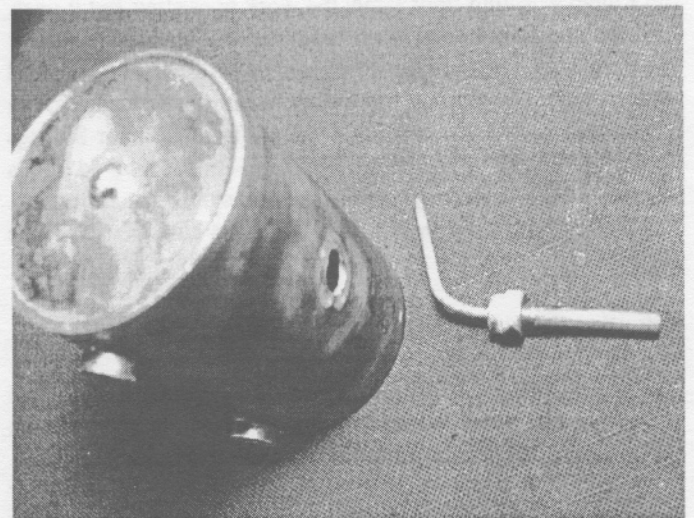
Fuel tank boss and pickup tube assembly with threaded mandrel attached.
